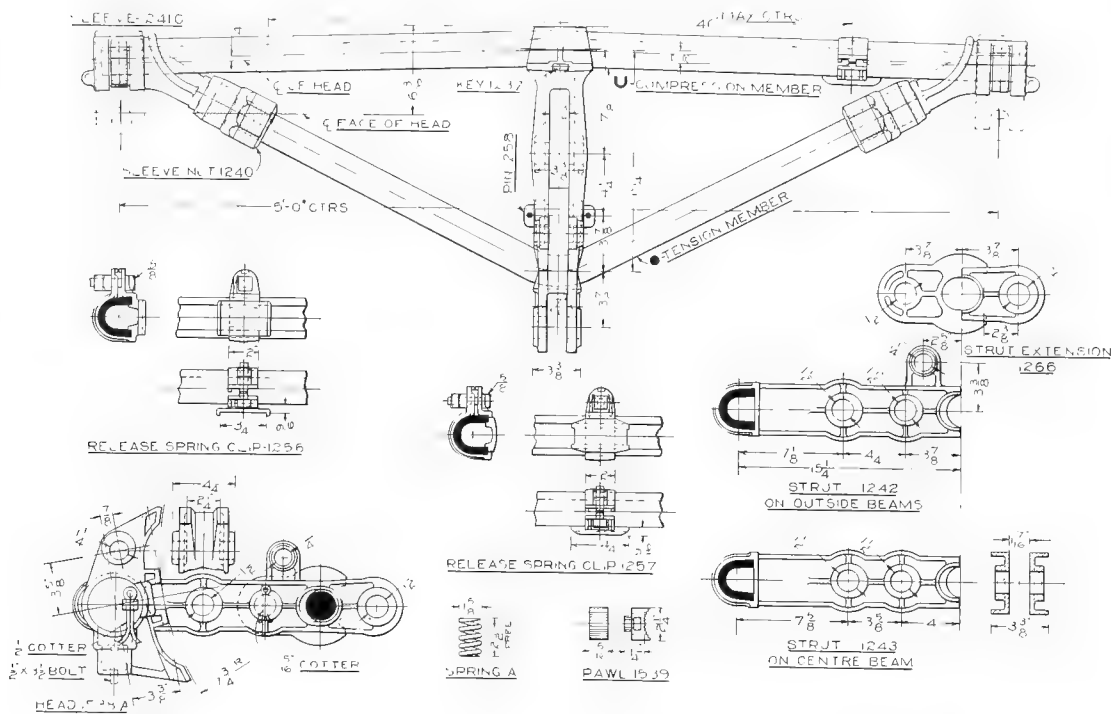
P C Creco Brake Beam for Heavy Service with Six-Wheel Trucks.
